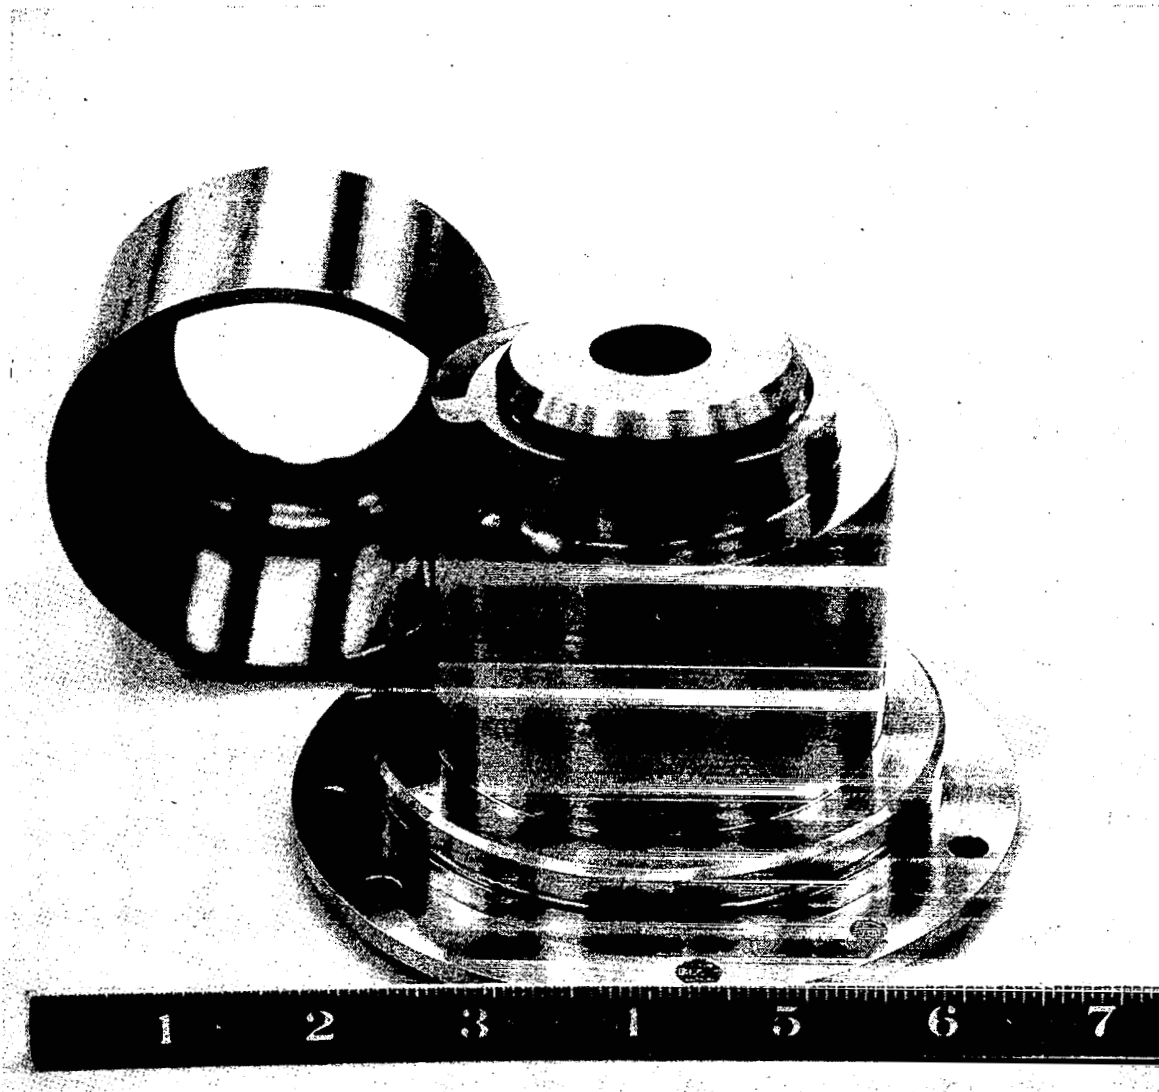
Annular Jet Scavenge Impeller and Collector-Discharge X-22829
